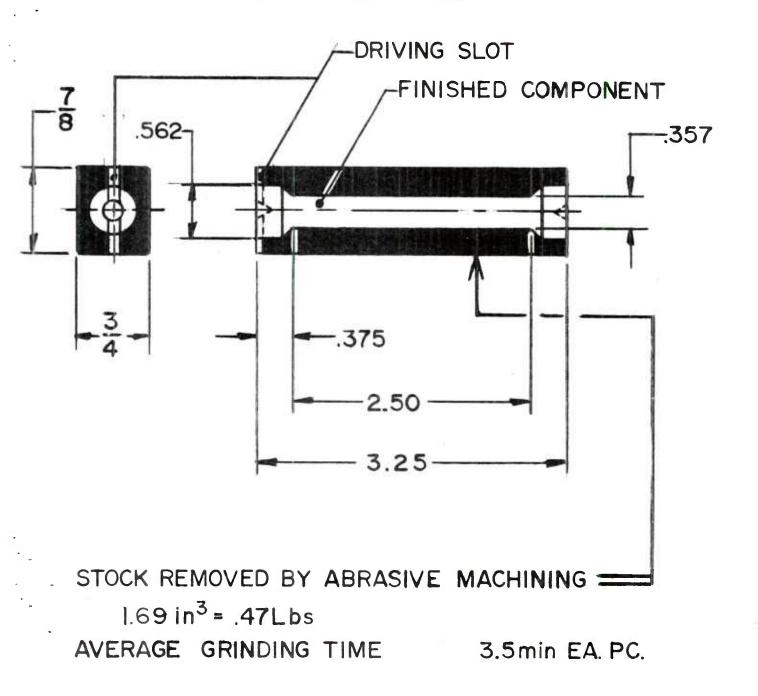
Stock Removed by Abrasive Machining-Test Specimen
